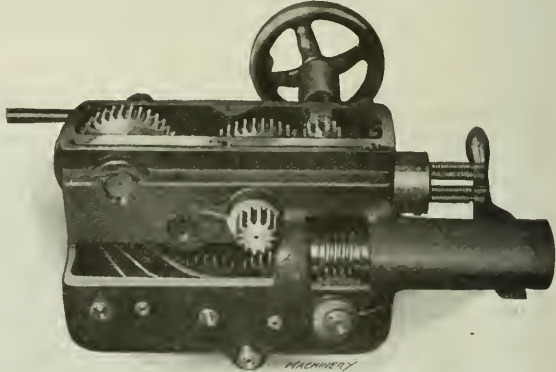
Rear View of Apron, showing Mechanism for making Feed Changes
